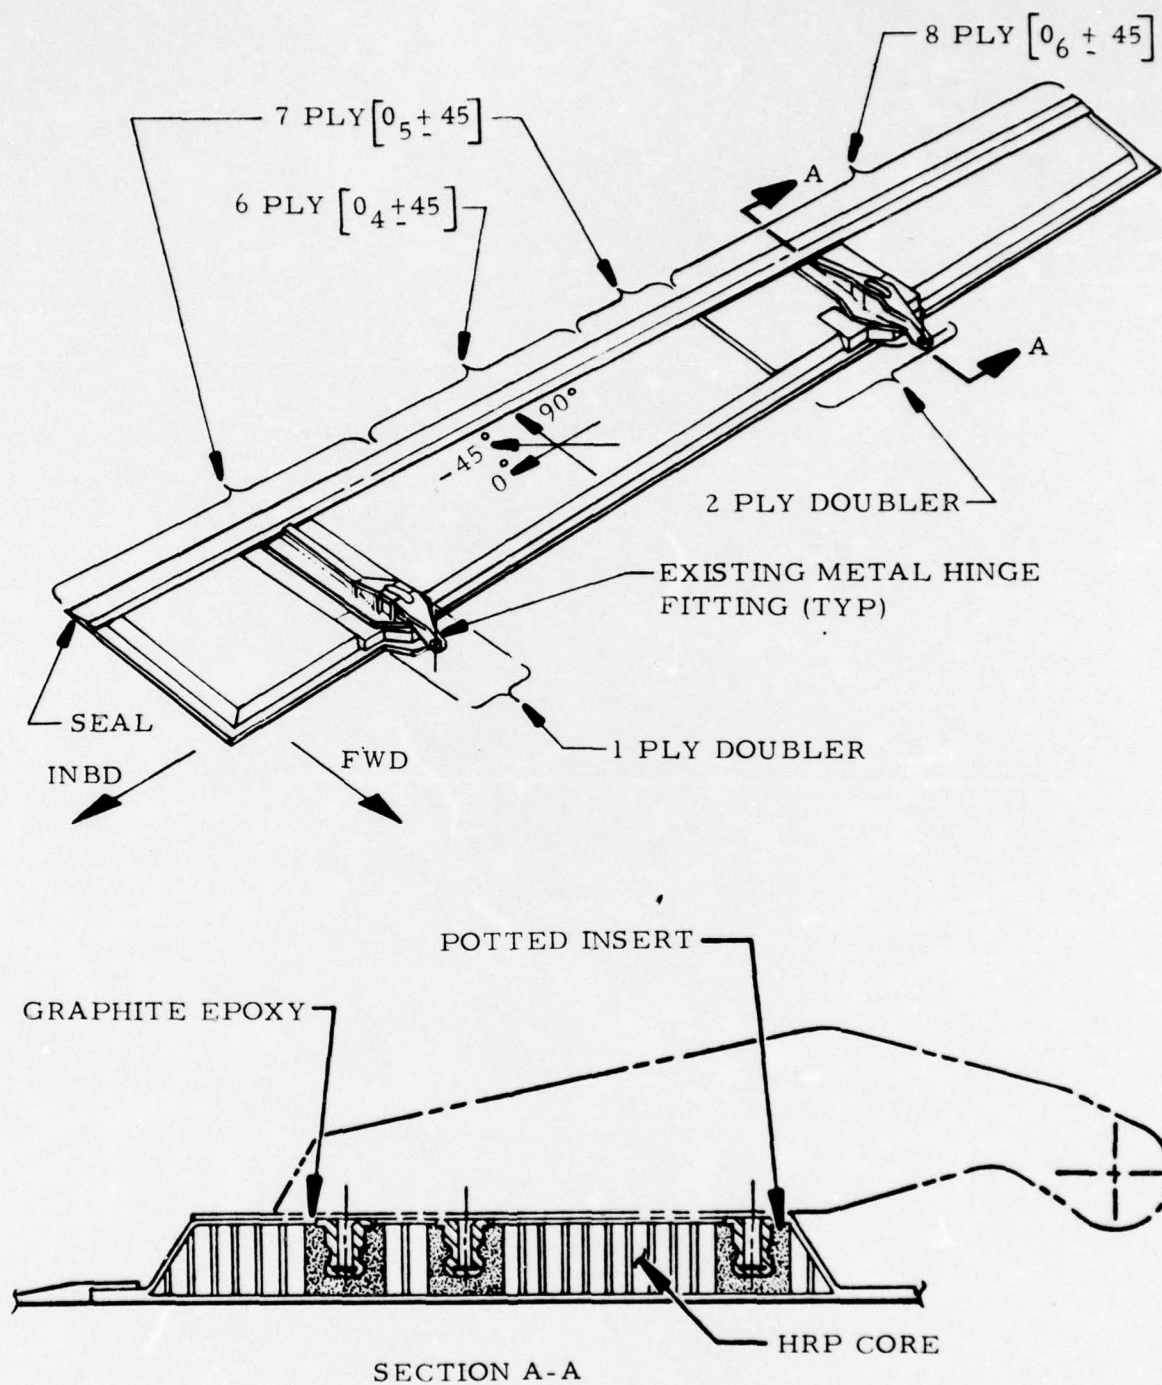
COMPOSITE SPOILER ASSEMBLY
